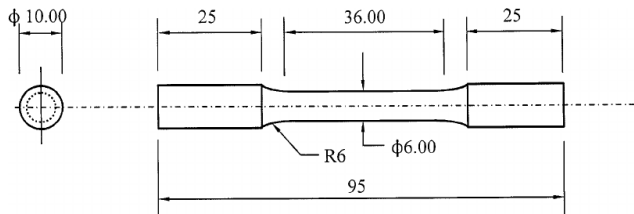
Tensile test specimen of low carbon steel ASTM E8/E8M-09 [12]
